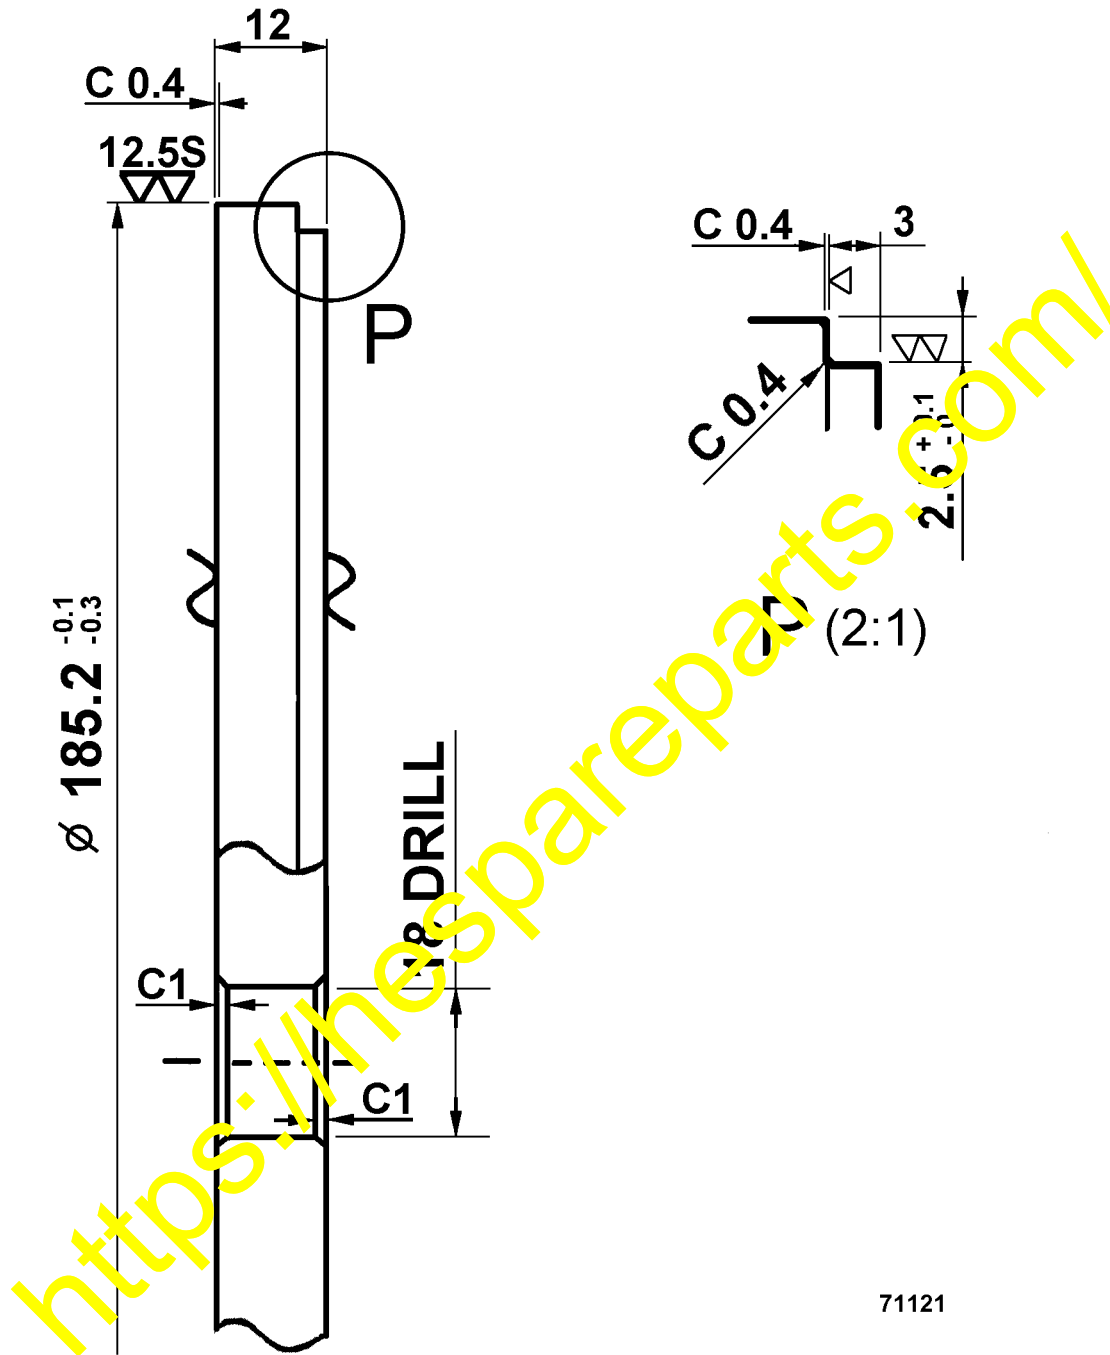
BUSHING INSTALLATION TOOL (561-99-79220)
